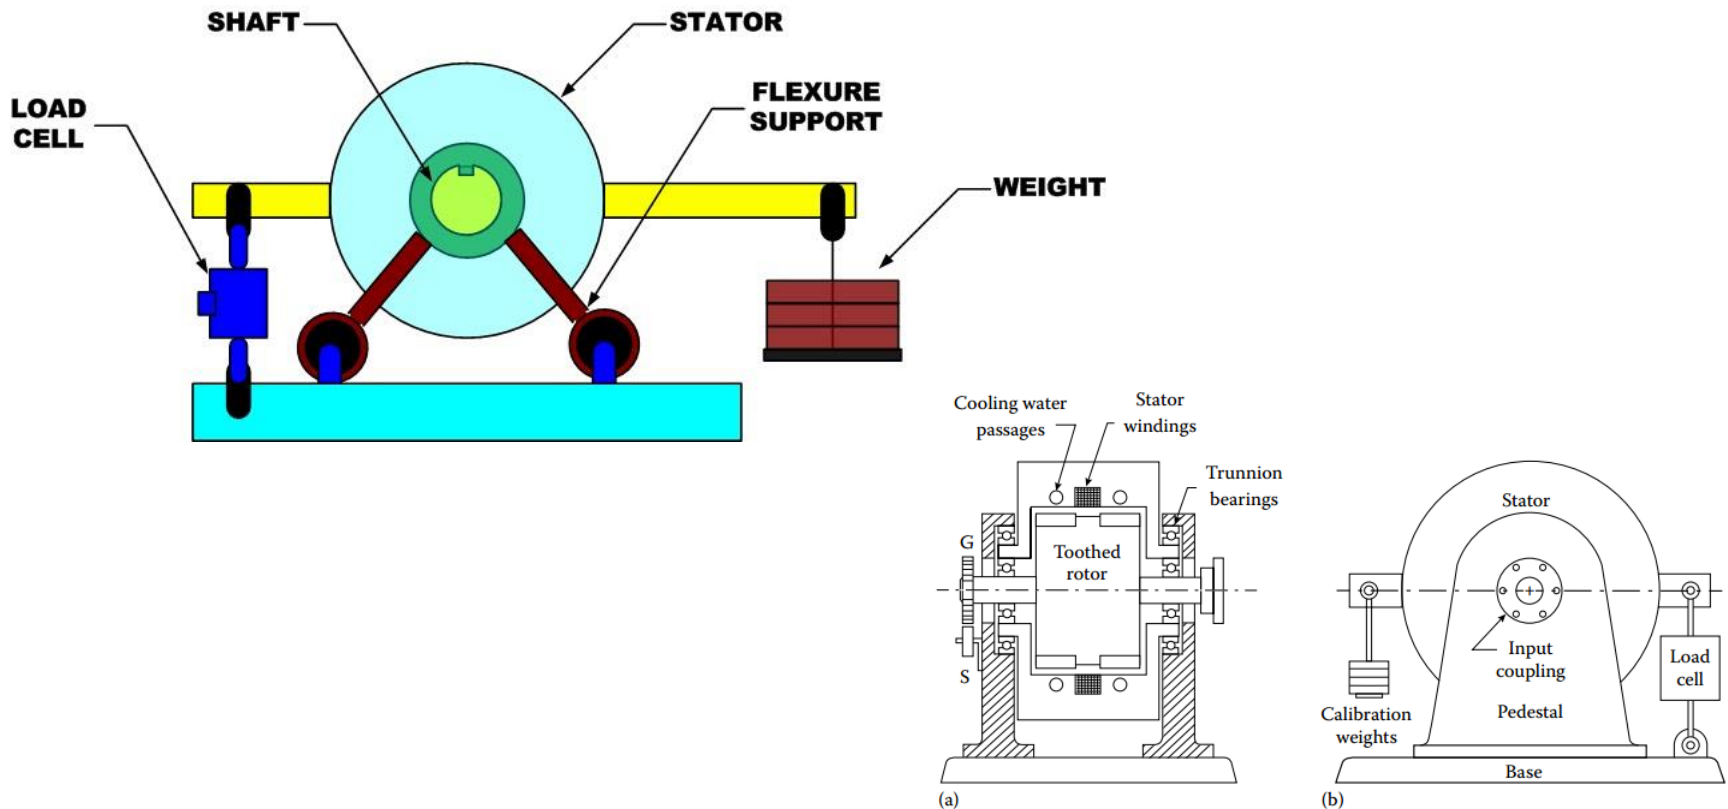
(a) Cross section and (b) front view of an eddy current dynamometer. G is a gear wheel and S is a speed sensor. Hoses carrying cooling water and cable carrying electric power to the stator are not shown.
